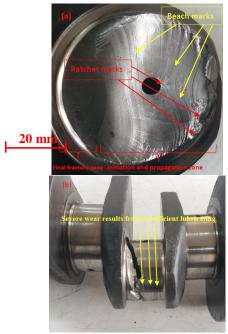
(a) Photograph of the failed crankshaft at the fifth crankpin; (b) The fractured surfaces of the crankshaft at the second crankpin
